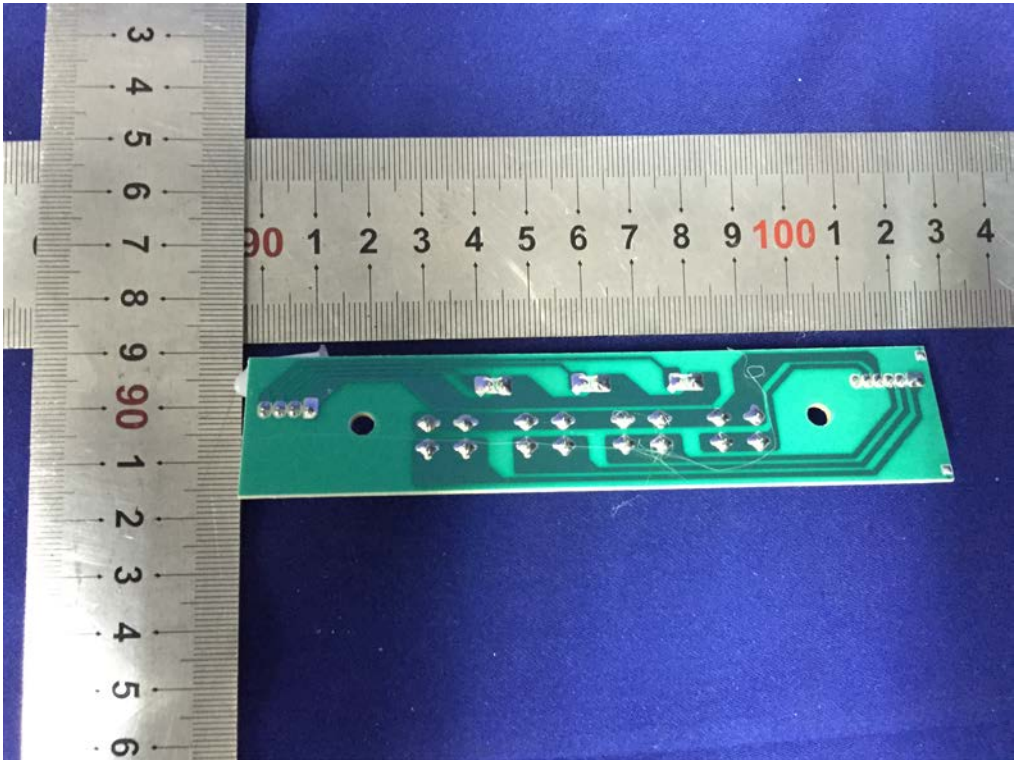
FlnInfini Lite 3kW-48V&FlnInfini Lite 4kW-48V PCB of panel board trace view
